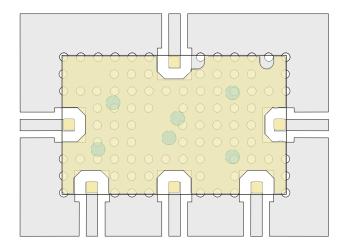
ACFM-7101 Outline and Bottom Metal Superposed on PCB Land Print.
